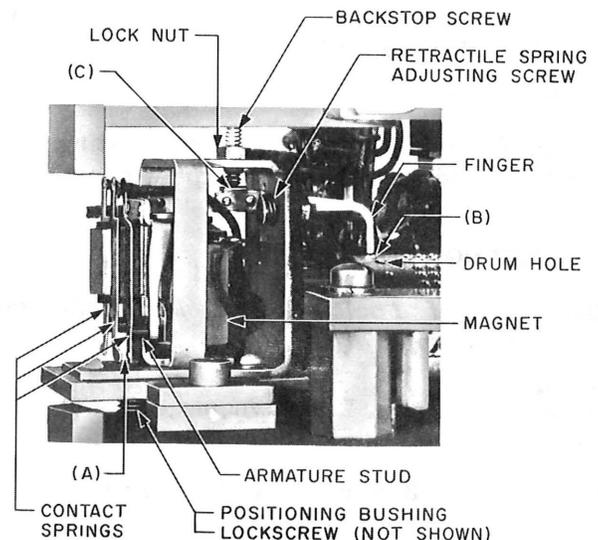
Drum Advance Checking Mechanism — Cover Removed
